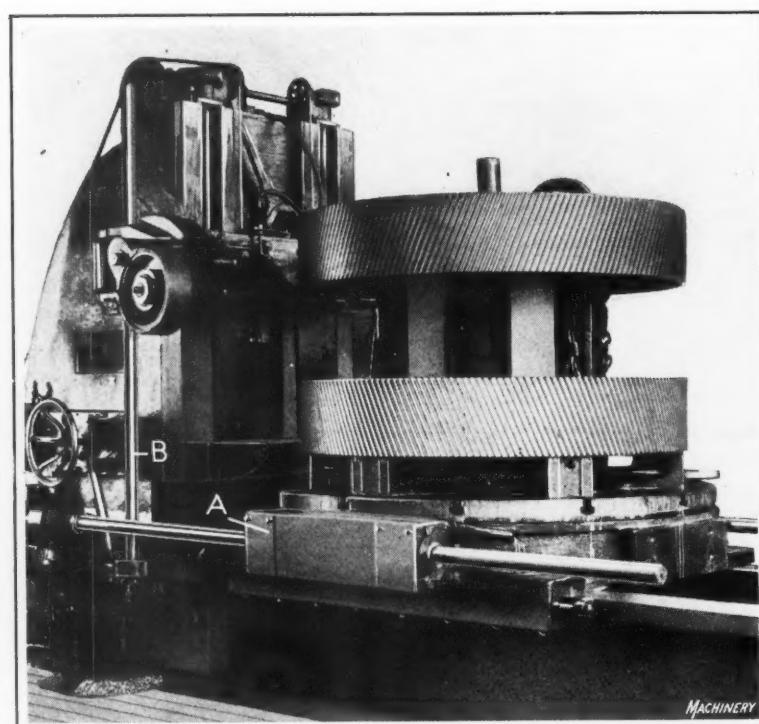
Large Machine of the Type having Two Hobs for cutting Both Sections of a Herringbone Gear simultaneously
